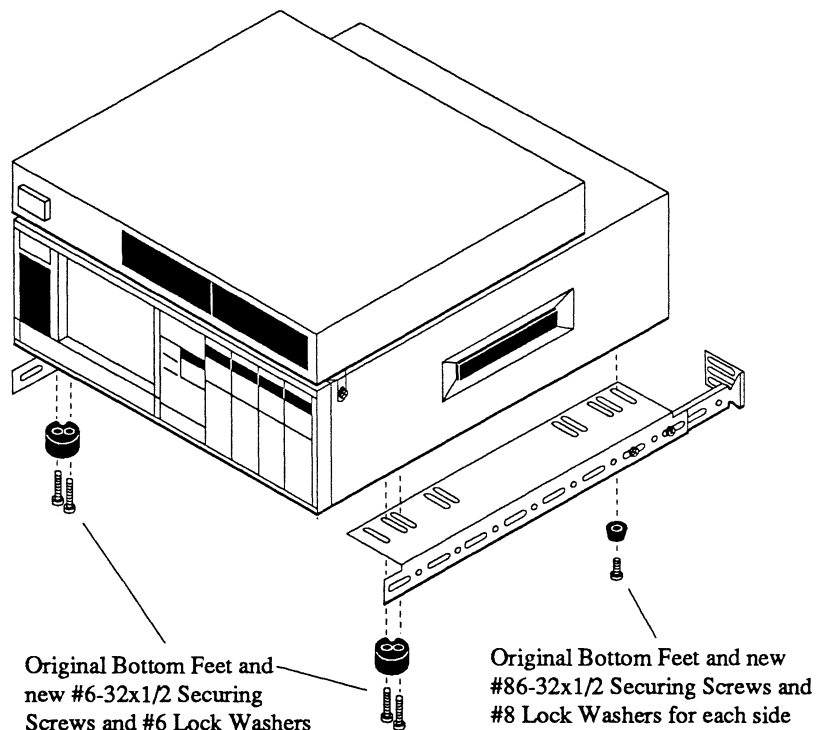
Mounting the scope (shown with a Pro Disk) to the rails.
